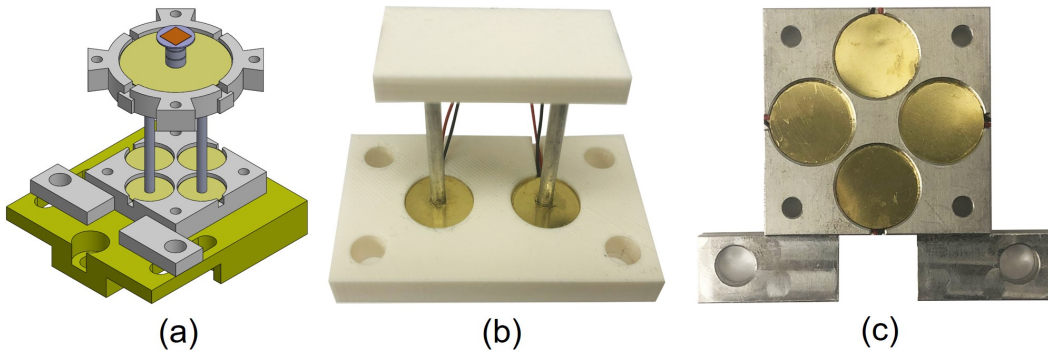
Buzzer scanner implementation: (a) 3D CAD mode of the buzzer scanner design, (b) simplified single in-plane axis buzzer scanner for testing, (c) partially assembled scanner with the four-buzzer configuration
